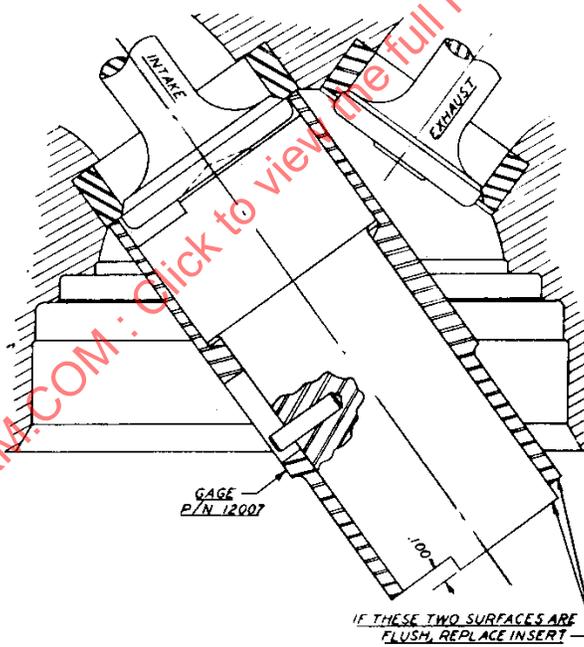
METHOD FOR CHECKING INTAKE VALVE SEATING LIMITS
